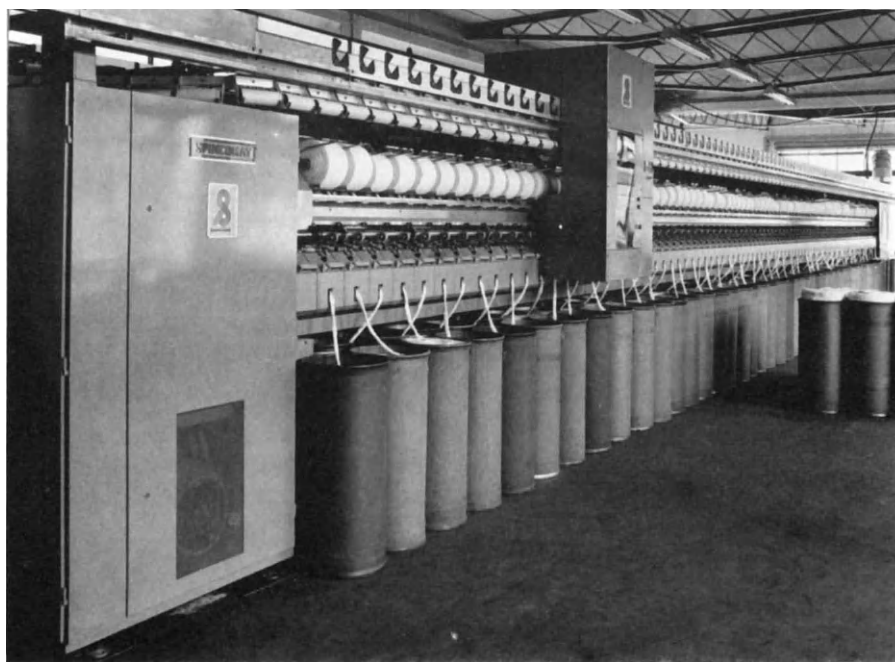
Automatic rotor spinning machine. This is a double-sided machine which can have up to 108 rotors per side at a pitch of 195 mm. Rotor speeds up to 80 000 rev/min are mechanically possible, with drafts from 25 to 200. The 'Automat' unit is clearly visible part-way along the machine. This unit automatically cleans the rotors, makes piecings, and doffs, providing a transfer tail. An
